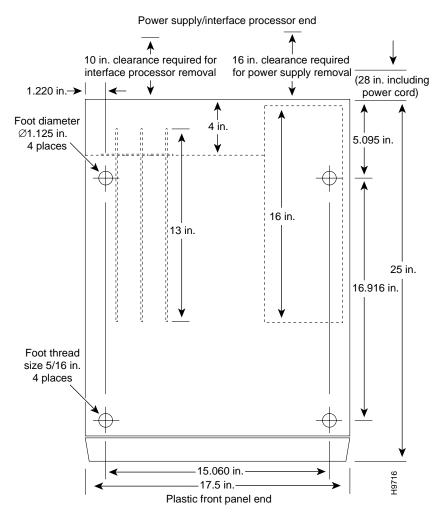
Chassis Footprint and Outer Dimensions (Cisco 7507 and Cisco 7507-MX)
